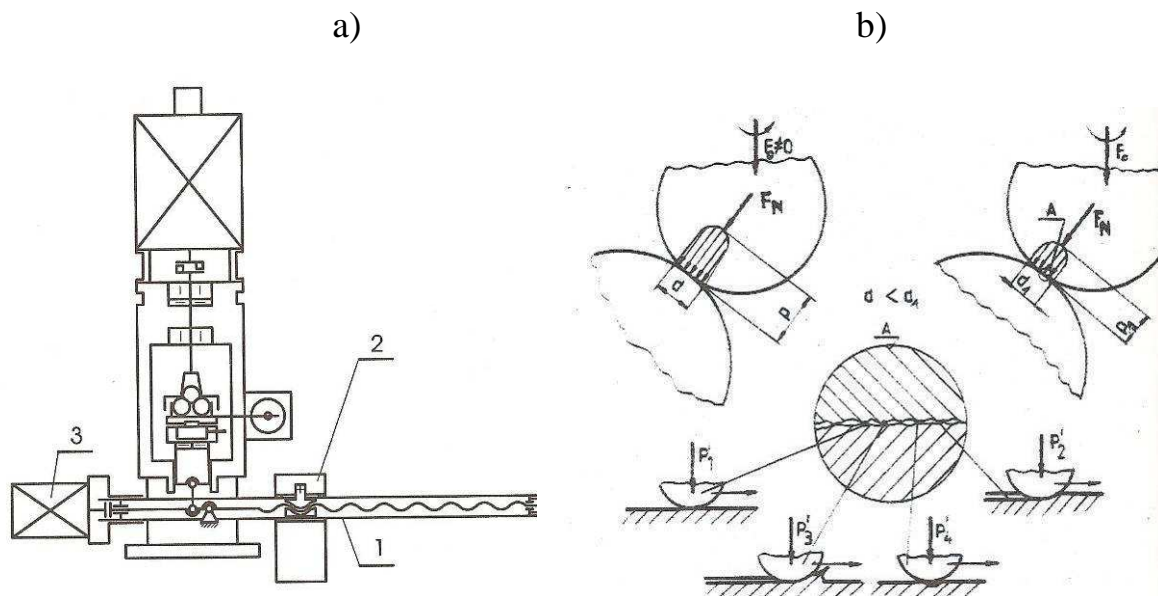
Kinematic scheme of the T-02 four ball testing equipment made by the ITE: a) 1- lever; 2- weight; 3 - engine shifting a weight [8]; b) possible different states of wear onto contact surface of upper ball with lower one
